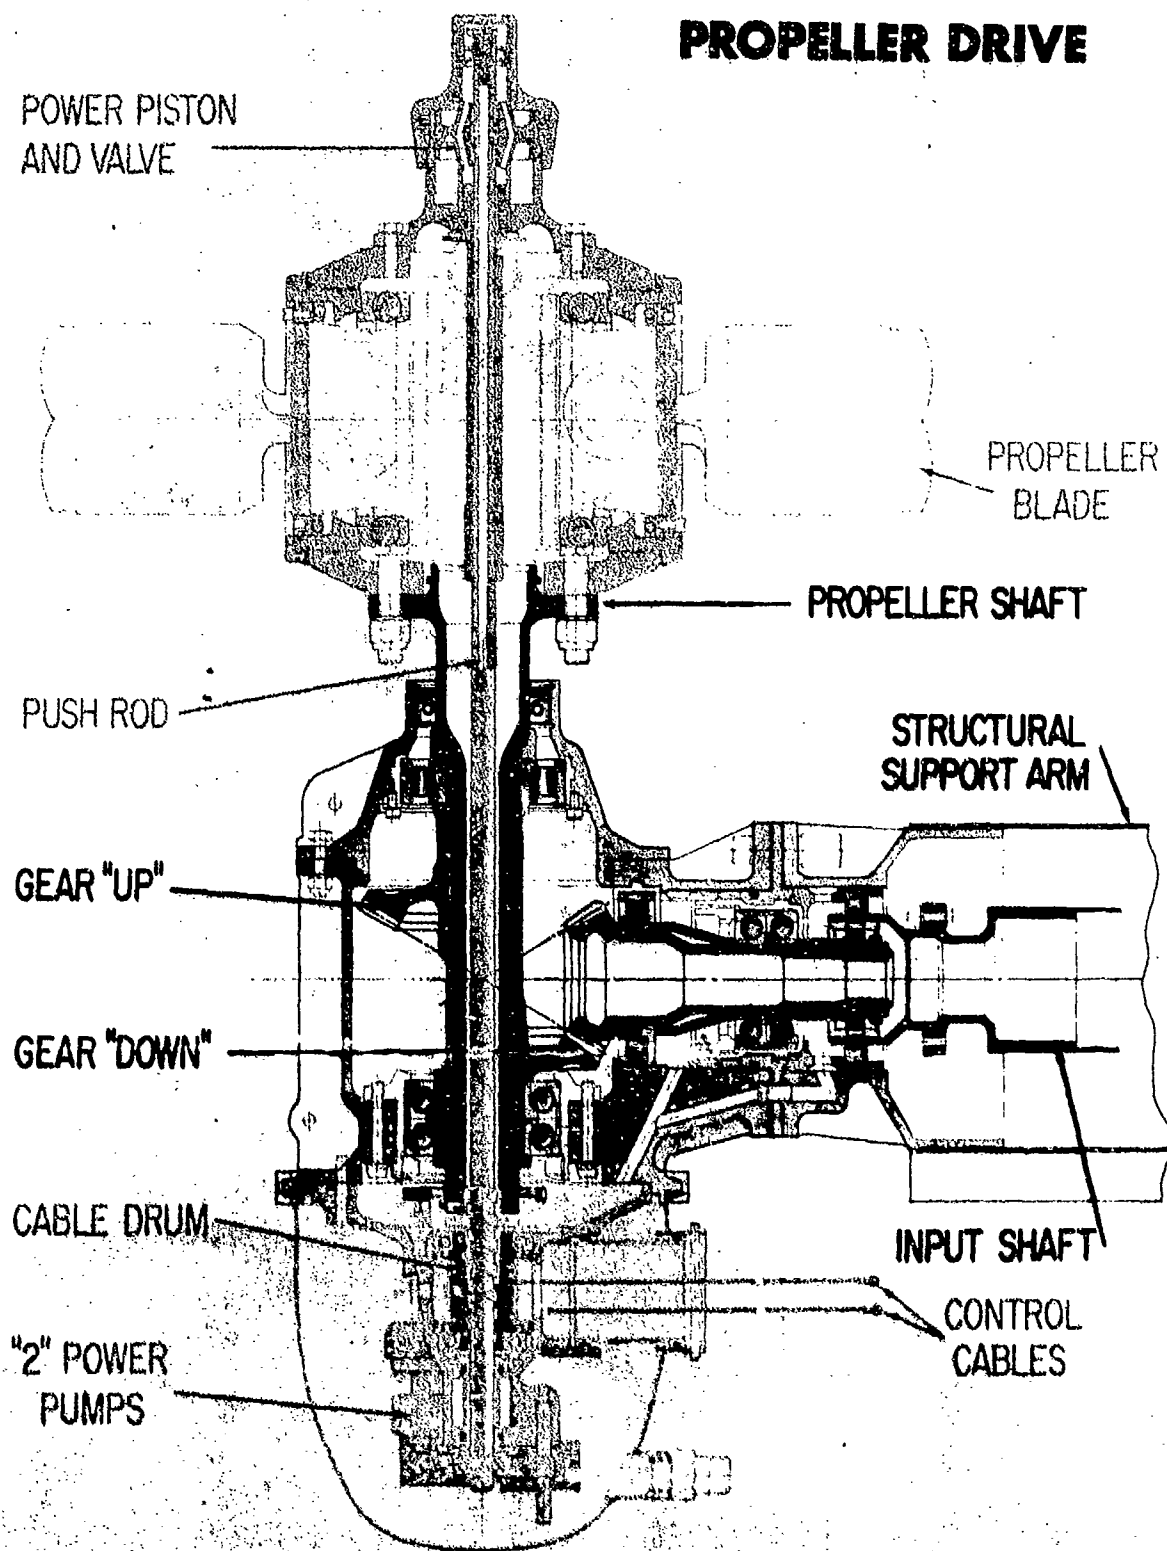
CUTAWAY VIEW OF PROPELLER DRIVE
